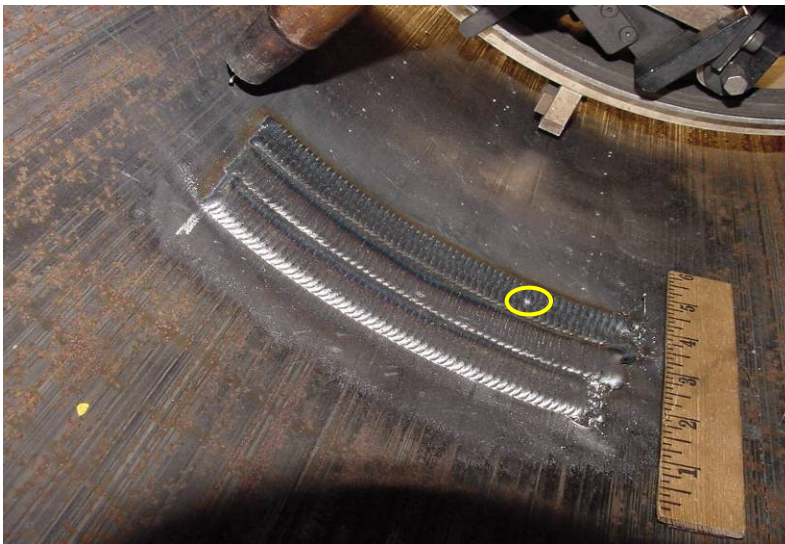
First Pass of Weld Layer 1 for Test 01
